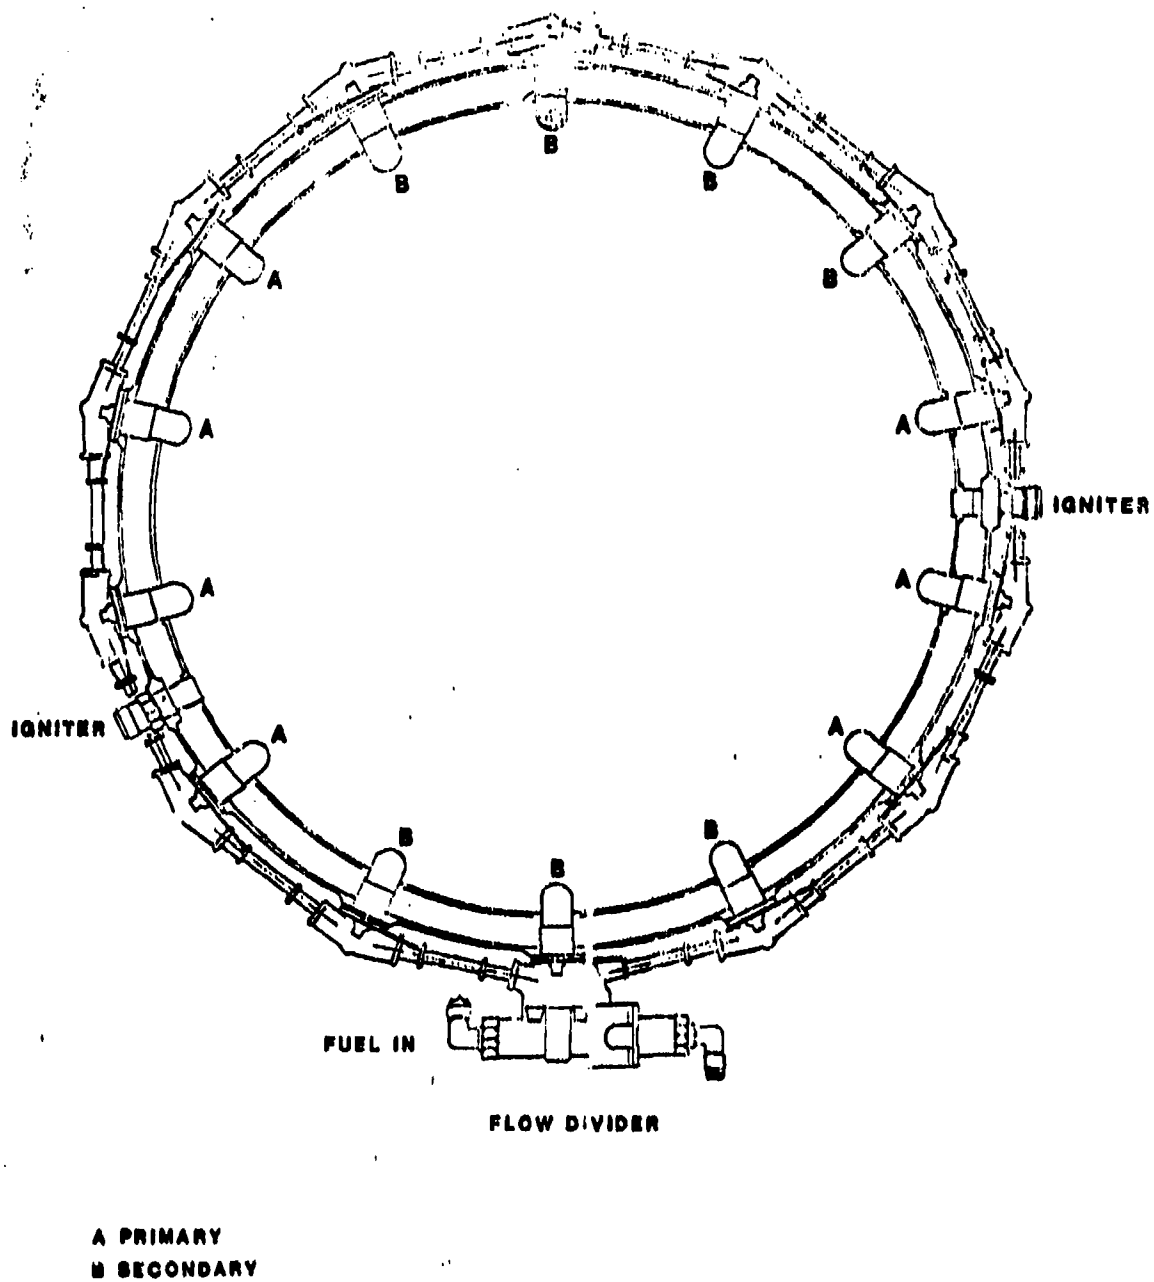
PT6A-65 Fuel Manifold Arrangement
